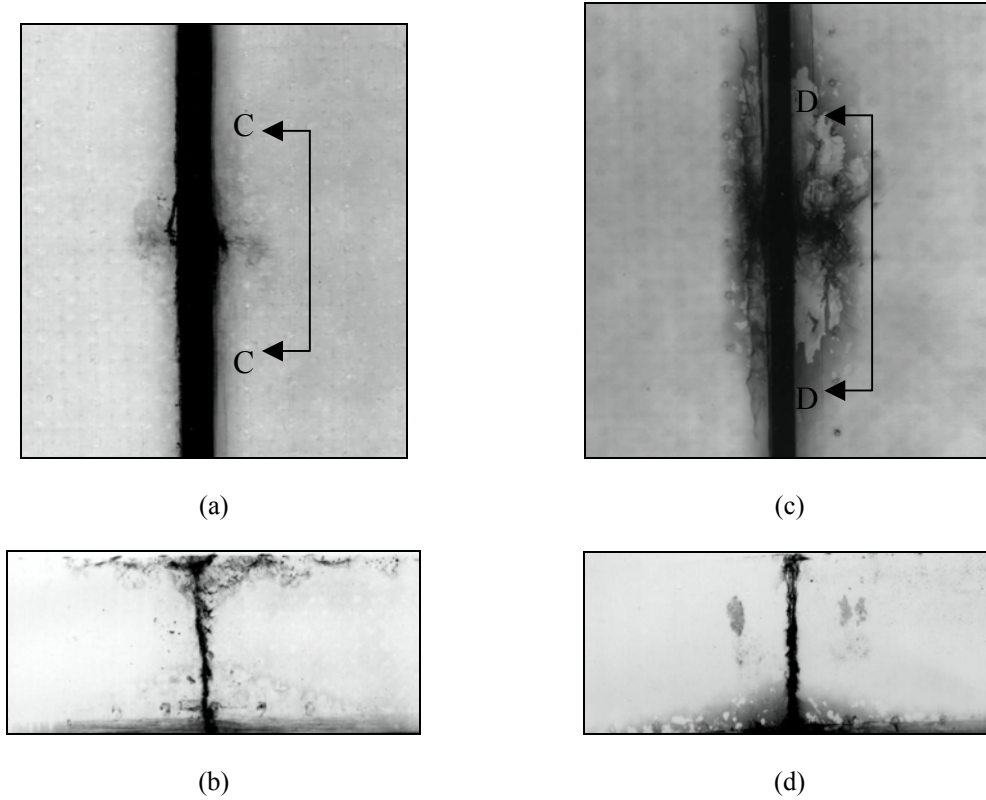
X-RAY PHOTO OF SELECTIVELY STITCHED CVSD (a) PLAN VIEW OF SEP2b, (b) STIFFENER VIEW OF SEP2b (C-C), (c) PLAN VIEW OF SEP1a, AND (d) STIFFENER VIEW OF SEP1a (D-D)
